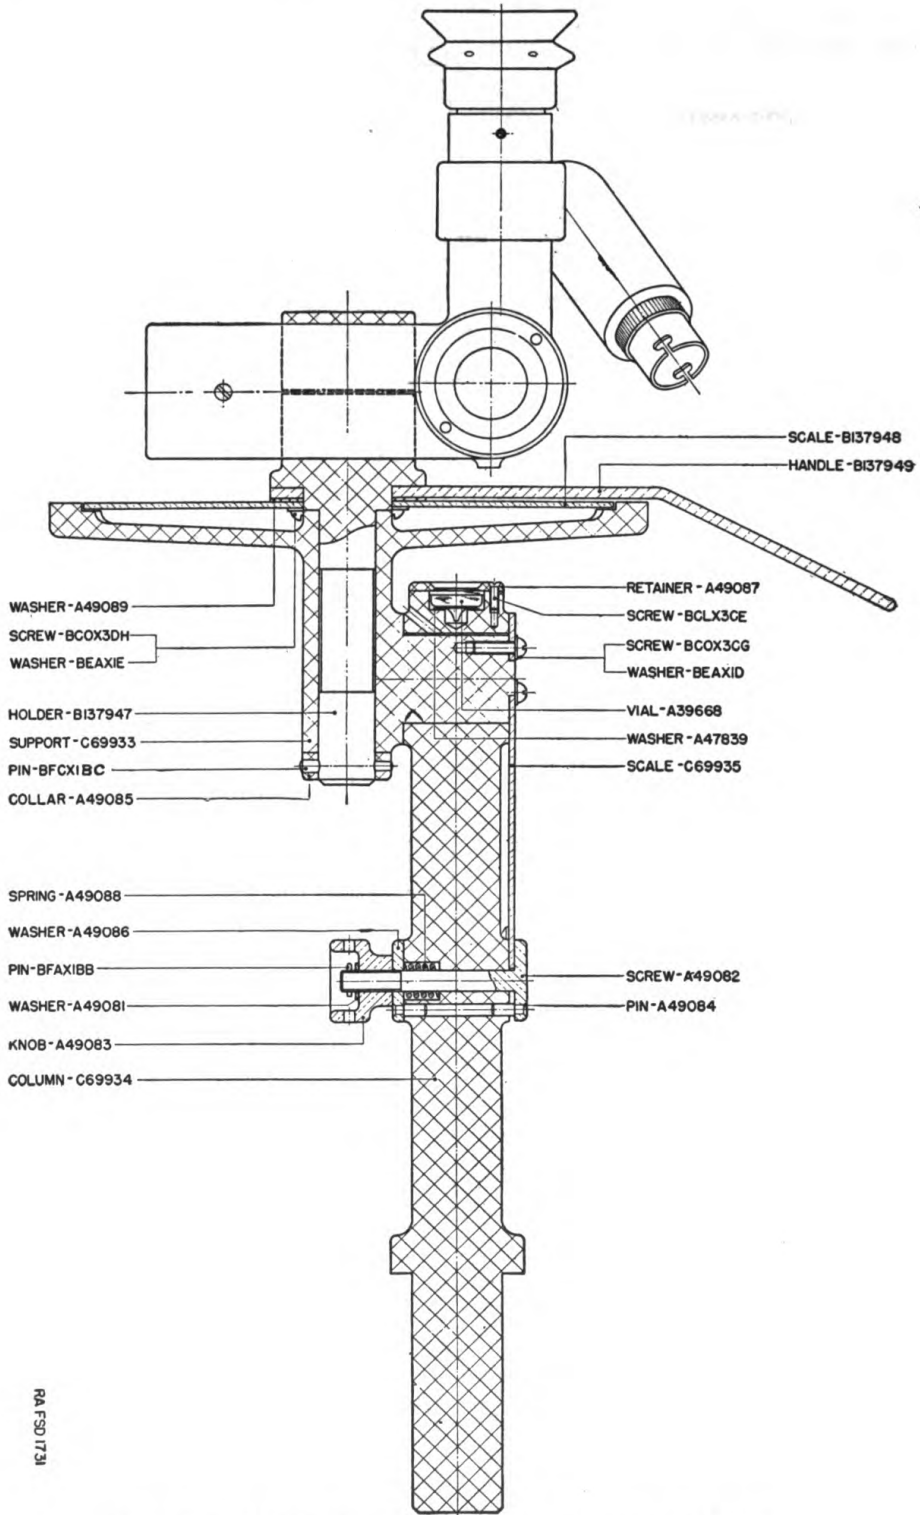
Flank spotting instrument, M1—sectioned views.
